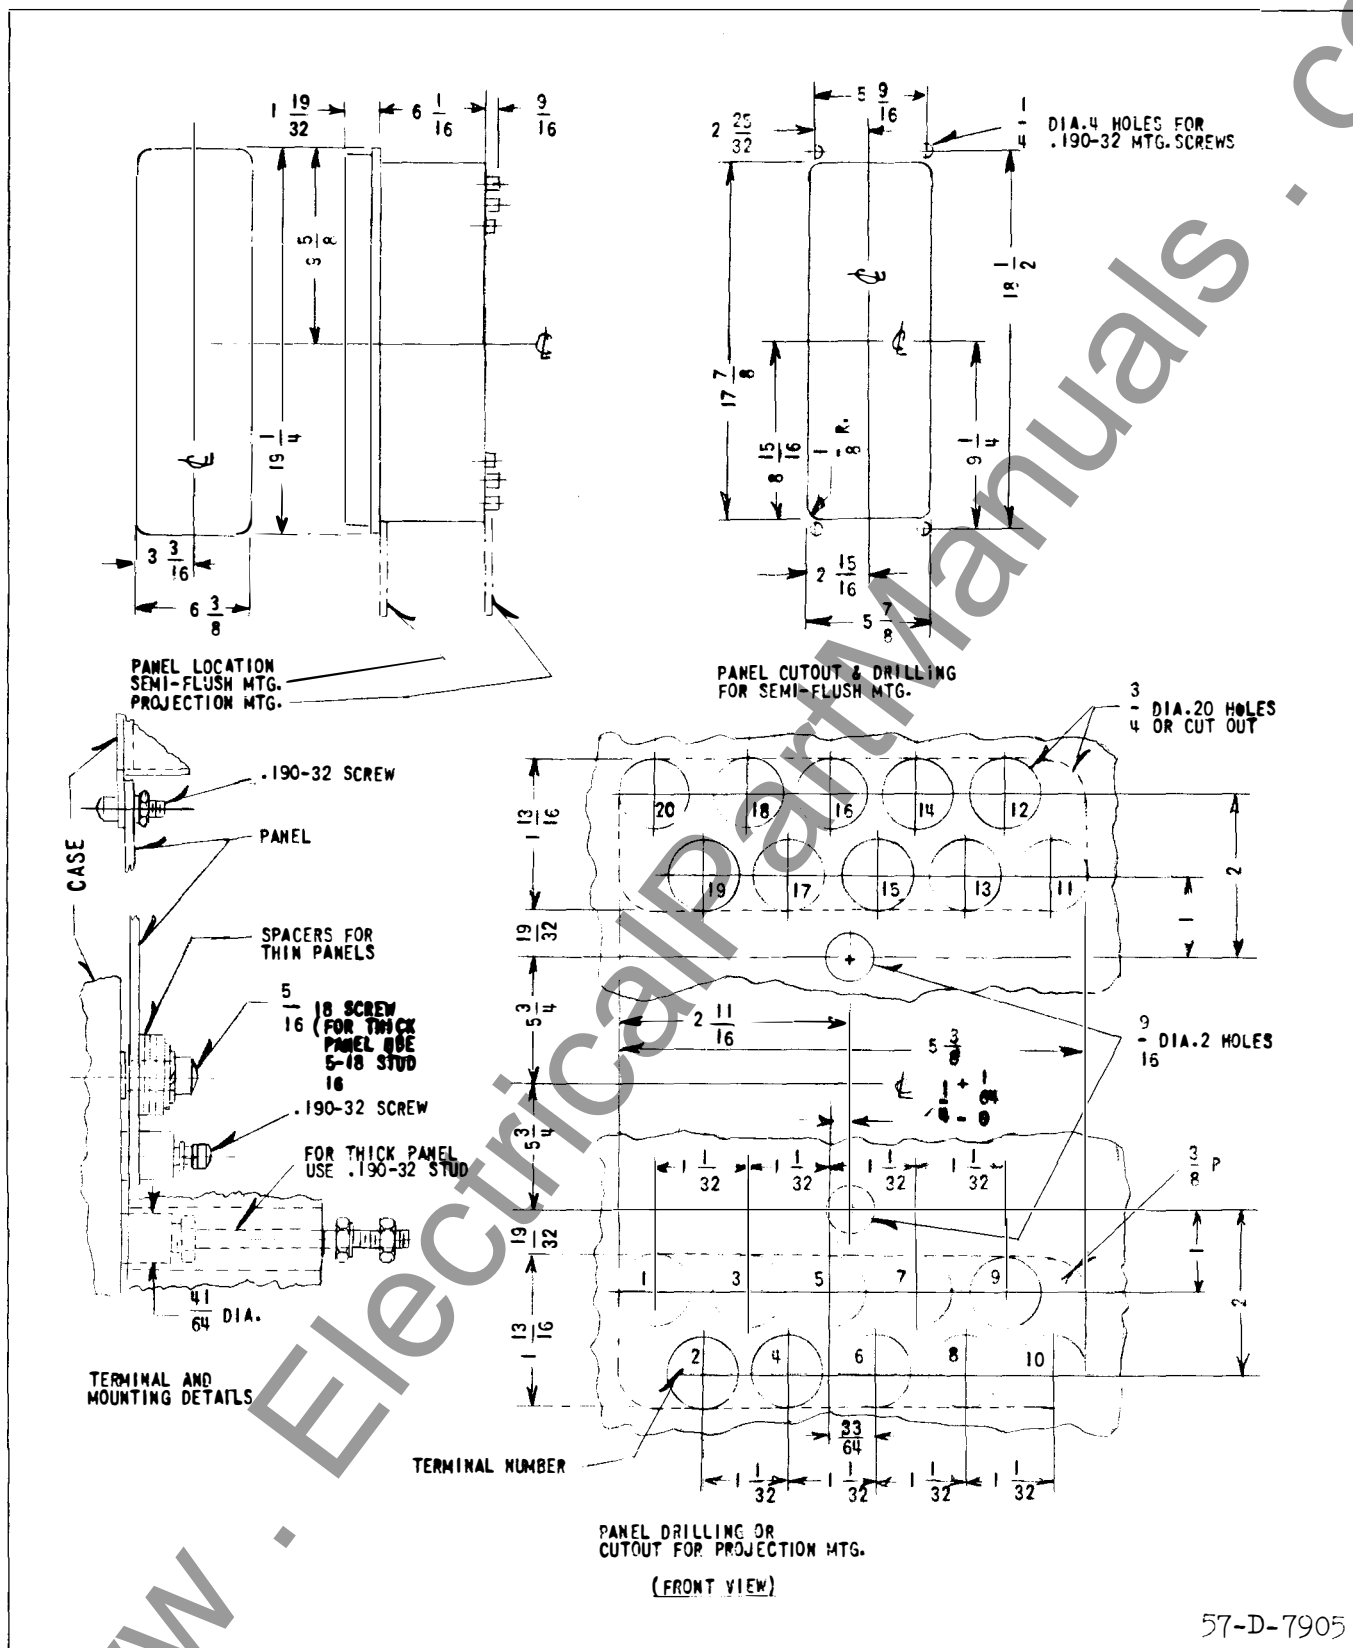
Outline and Drilling Plan for the Type FT42 Case
